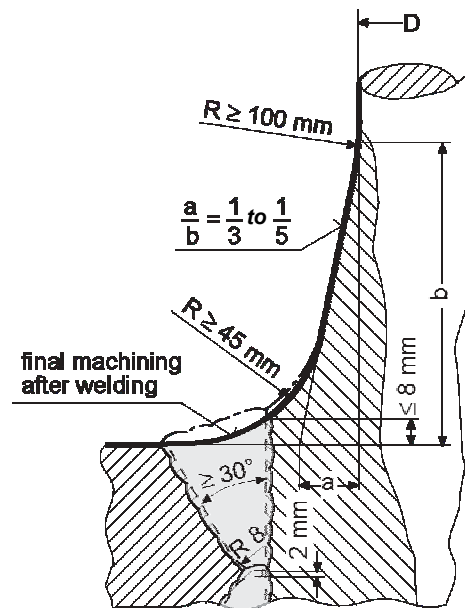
Welded joint between rudder stock and coupling flange
